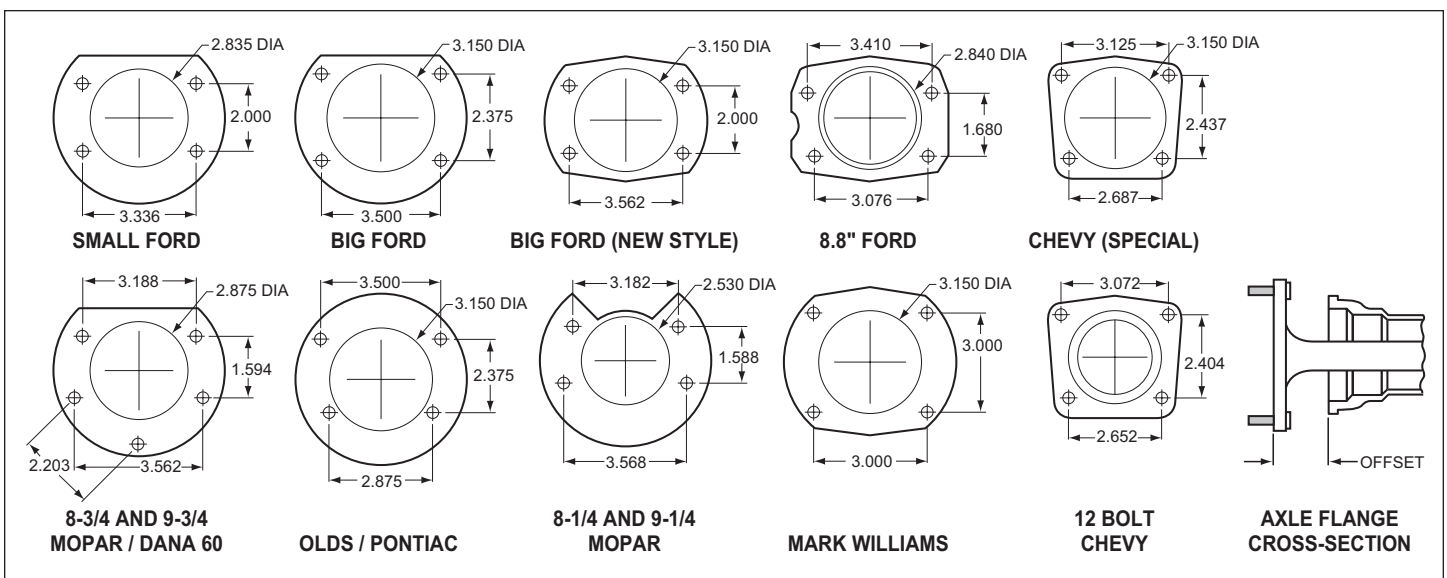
Rear Housing Flange Chart and Axle Flange / Offset Cross-Section
